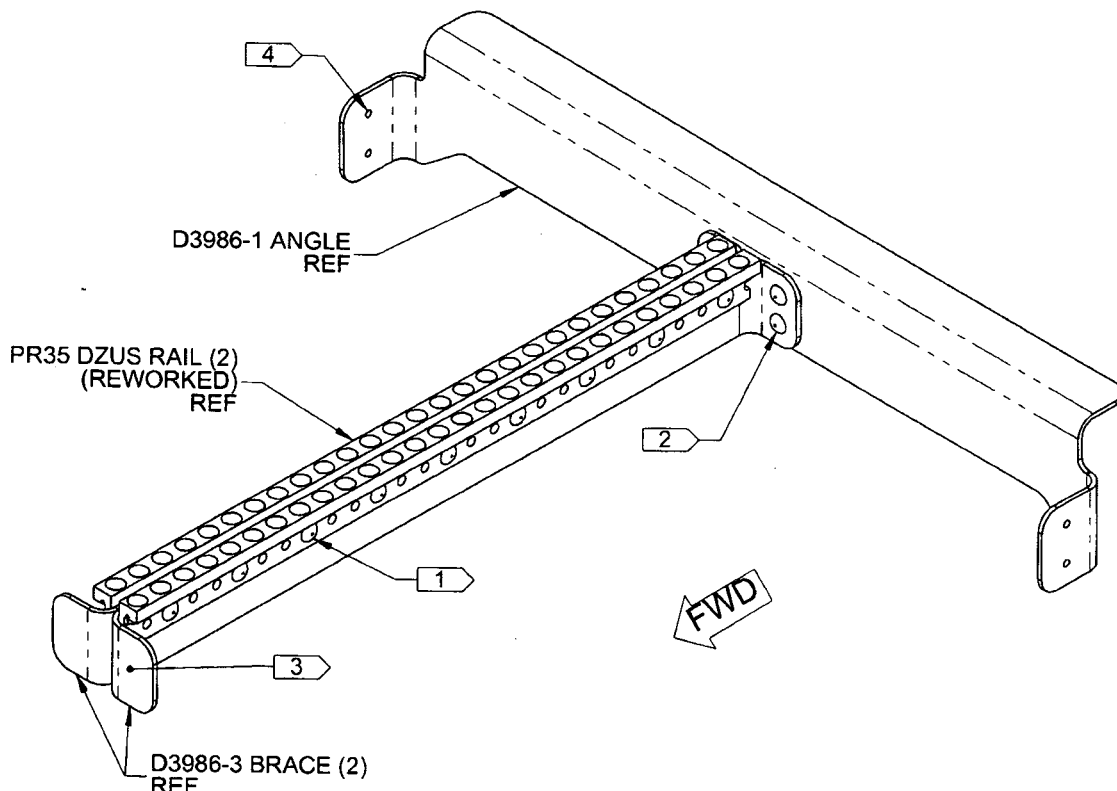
D212-722-013 DZUS RAIL BRACE INSTALLATION
